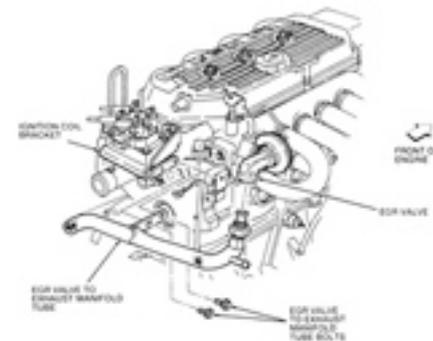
EGR valve tube-to-exhaust manifold routing-1994-96 1.9L engine
